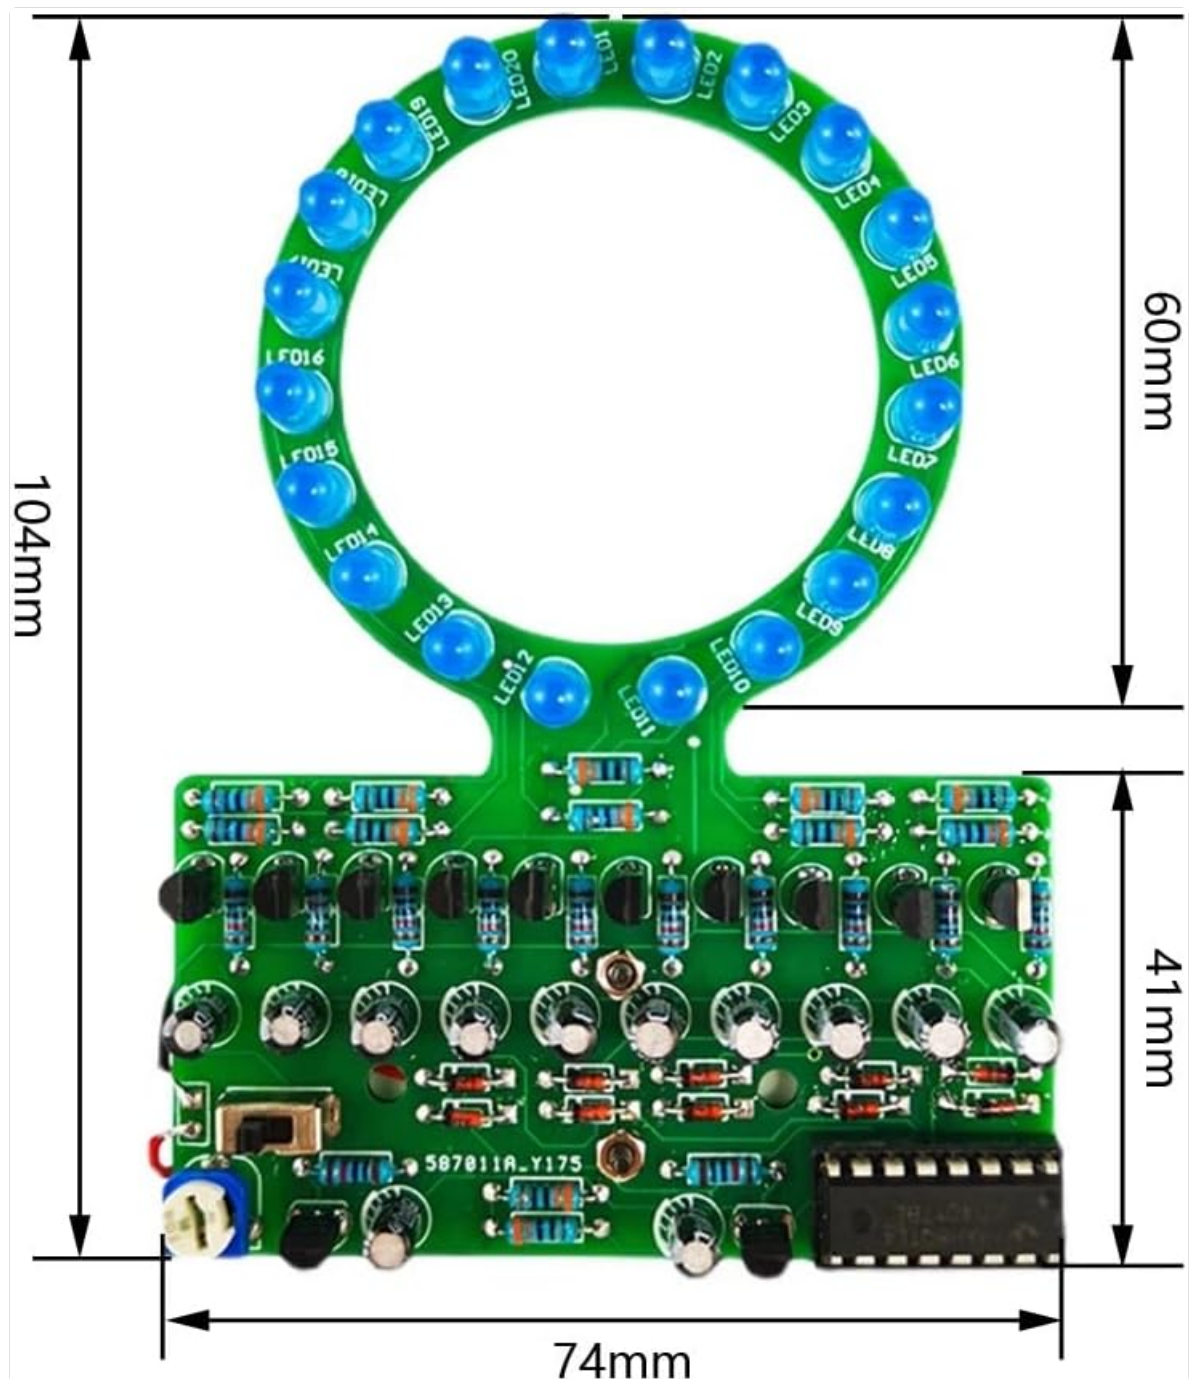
Dimensional drawing of the assembled PCB, indicating measurements of 104mm in height and 74mm in width.
